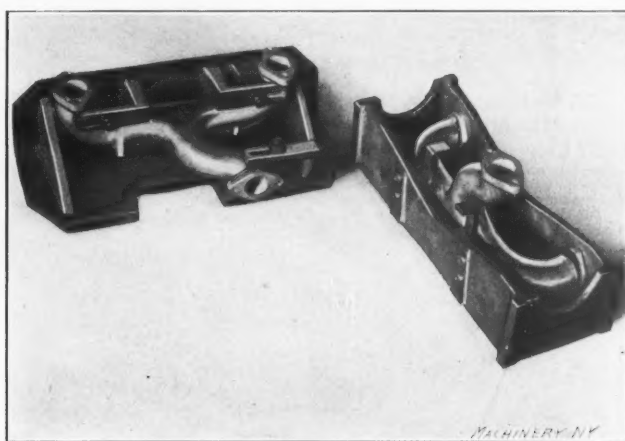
Milling and Drilling Jigs for the Intake Pipes
